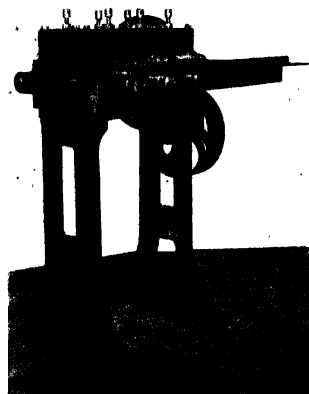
Continuous forming machine for various operations on strip or coil material. (Walter Frost and Co., Ltd.)
